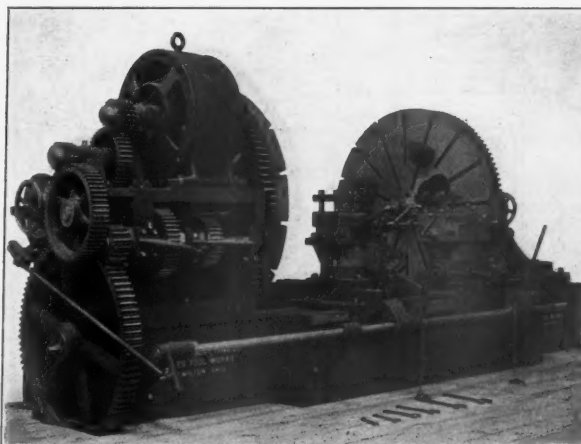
Niles-Bement-Pond 79-in. Standard Driving Wheel Lathe.
